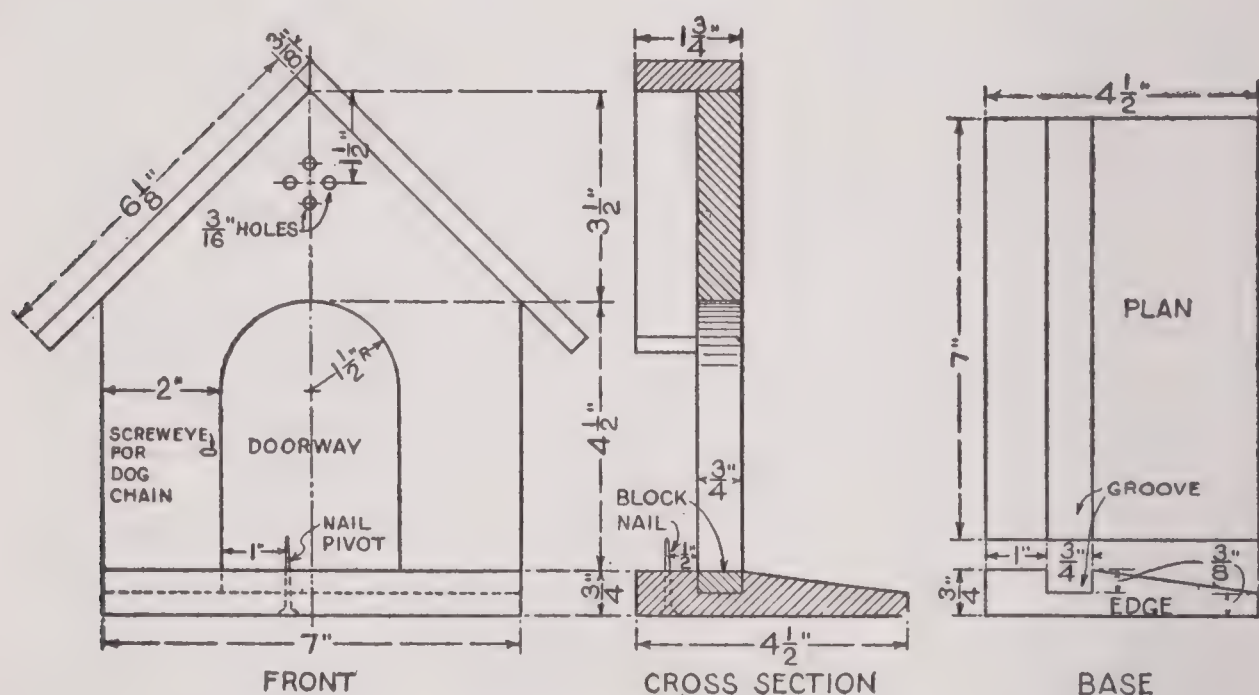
Details of Pup Door-Stop shown in Fig. 139.
